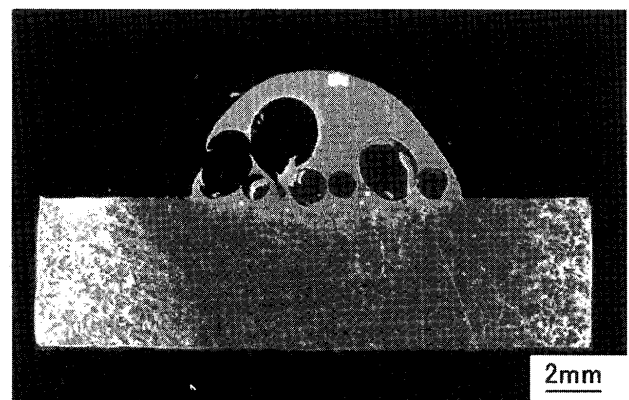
Blow holes appeared on the cross section of the weld bead of AZ91D Mg alloy die cast welded by MIG arc with AZ61 electrode wire.
